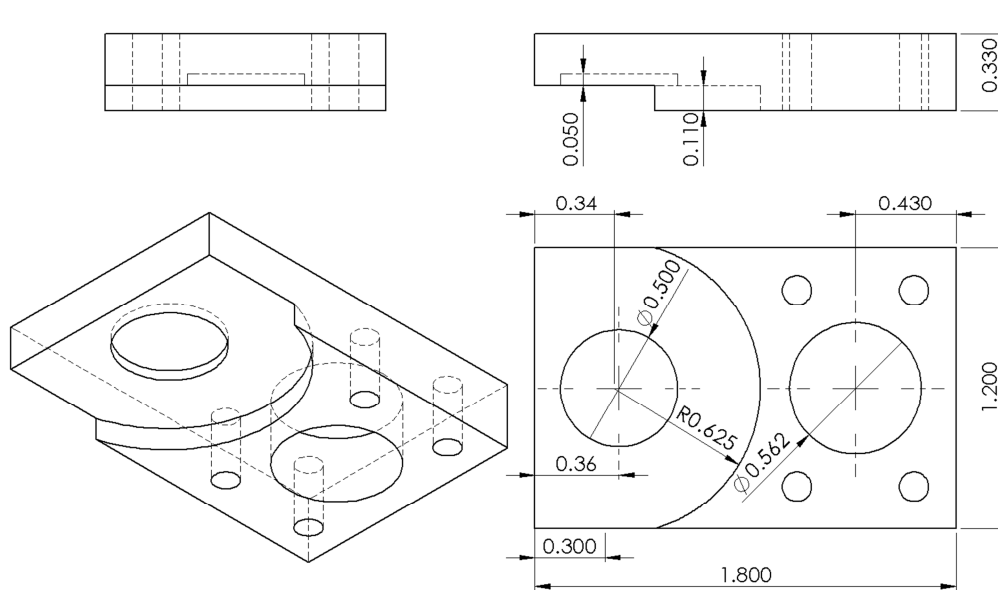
An engineering drawing with multiple views of the sensor mount/air bearing support. Unit: Inch.
